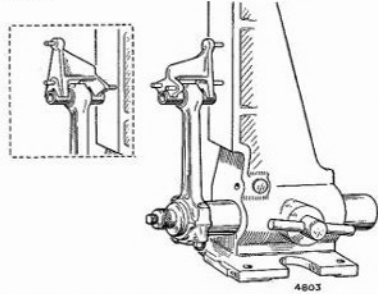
Checking the connecting rod for parallelism and twist between the small and big end bores, using the Churchill Tool 335, in conjunction with the adaptor set R.G.336-3B
